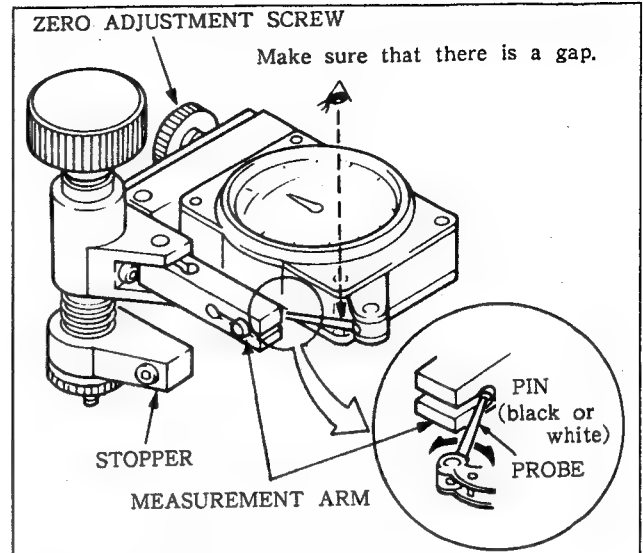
Upper Drum Eccentricity Adj. Gauge
